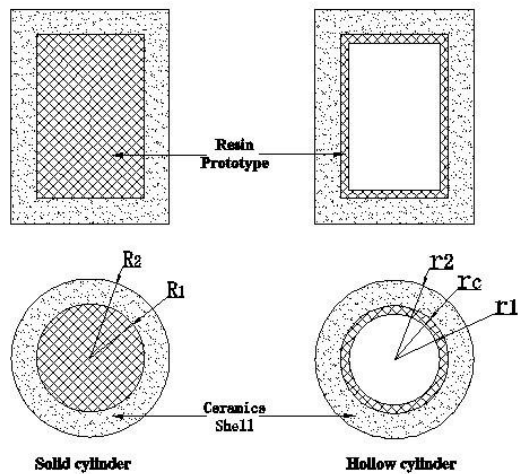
Cylindrical resin prototype pattern wrapped with refractory shell
